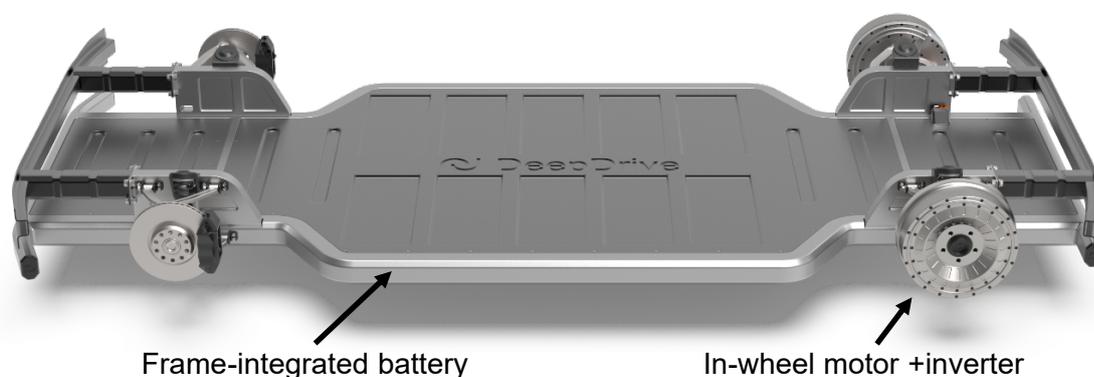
CAD rendering of rolling chassis including the frame-integrated battery and the in-wheel motors at the rear axle. Courtesy of DeepDrive GmbH.
